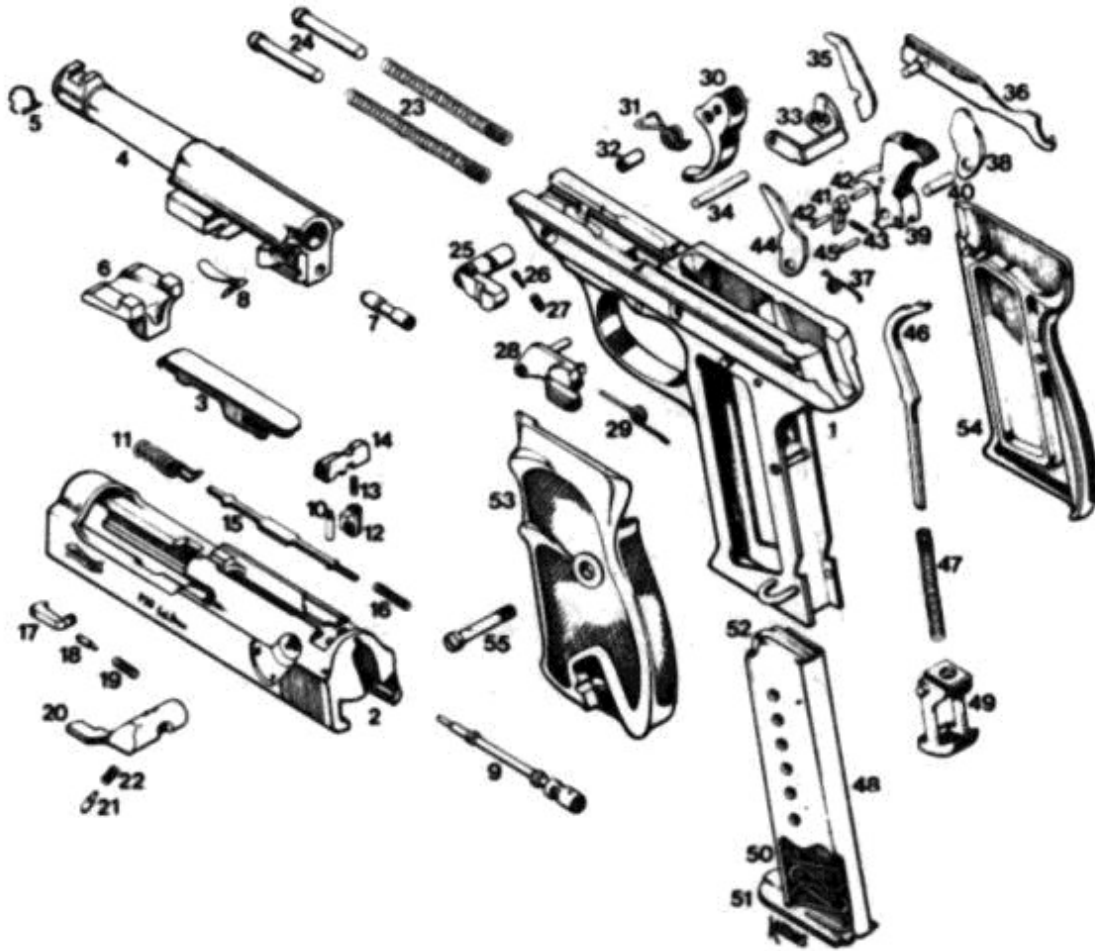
Exploded views greatly simplify the assembly/disassembly process. Collect all you can find.
